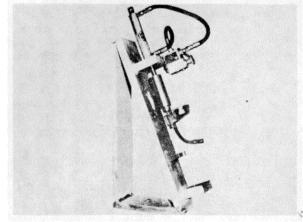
H-19. Injector Plunger Sticking Tool A. Place the assembled injector in the tool (cup in bearing).
